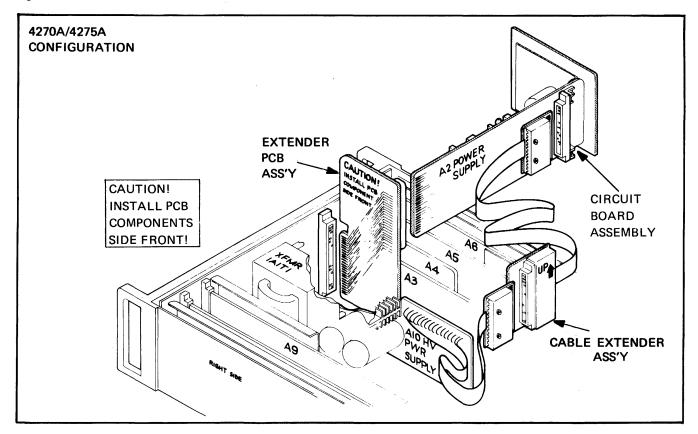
EXTENDER PCB AND CABLE EXTENDER ASSEMBLIES INSTALLED IN 4270A/4275A INSTRUMENTS
